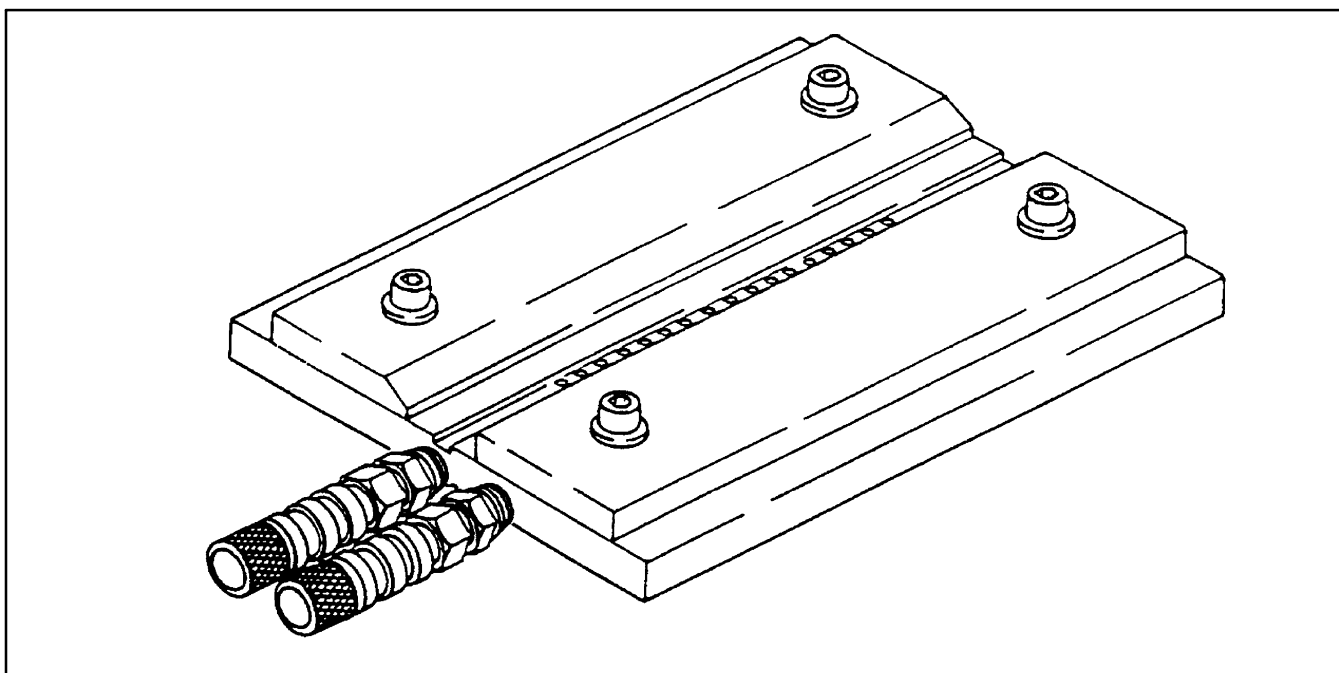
T-Joint Welding Fixture, Pictorial (Typical)
